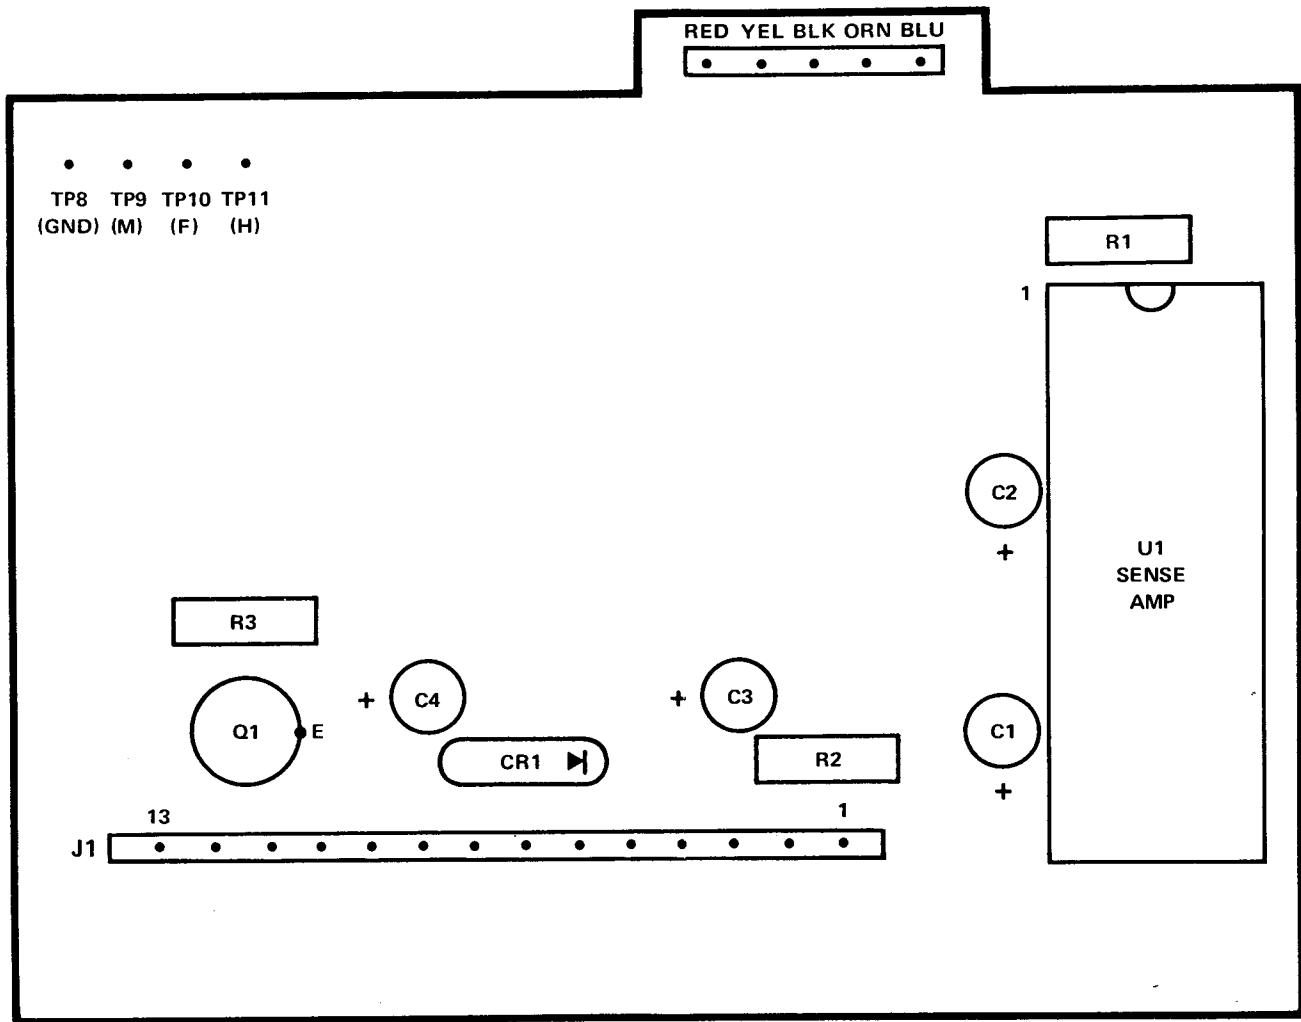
Card Reader PCA (A3A1) Component Location Diagram
